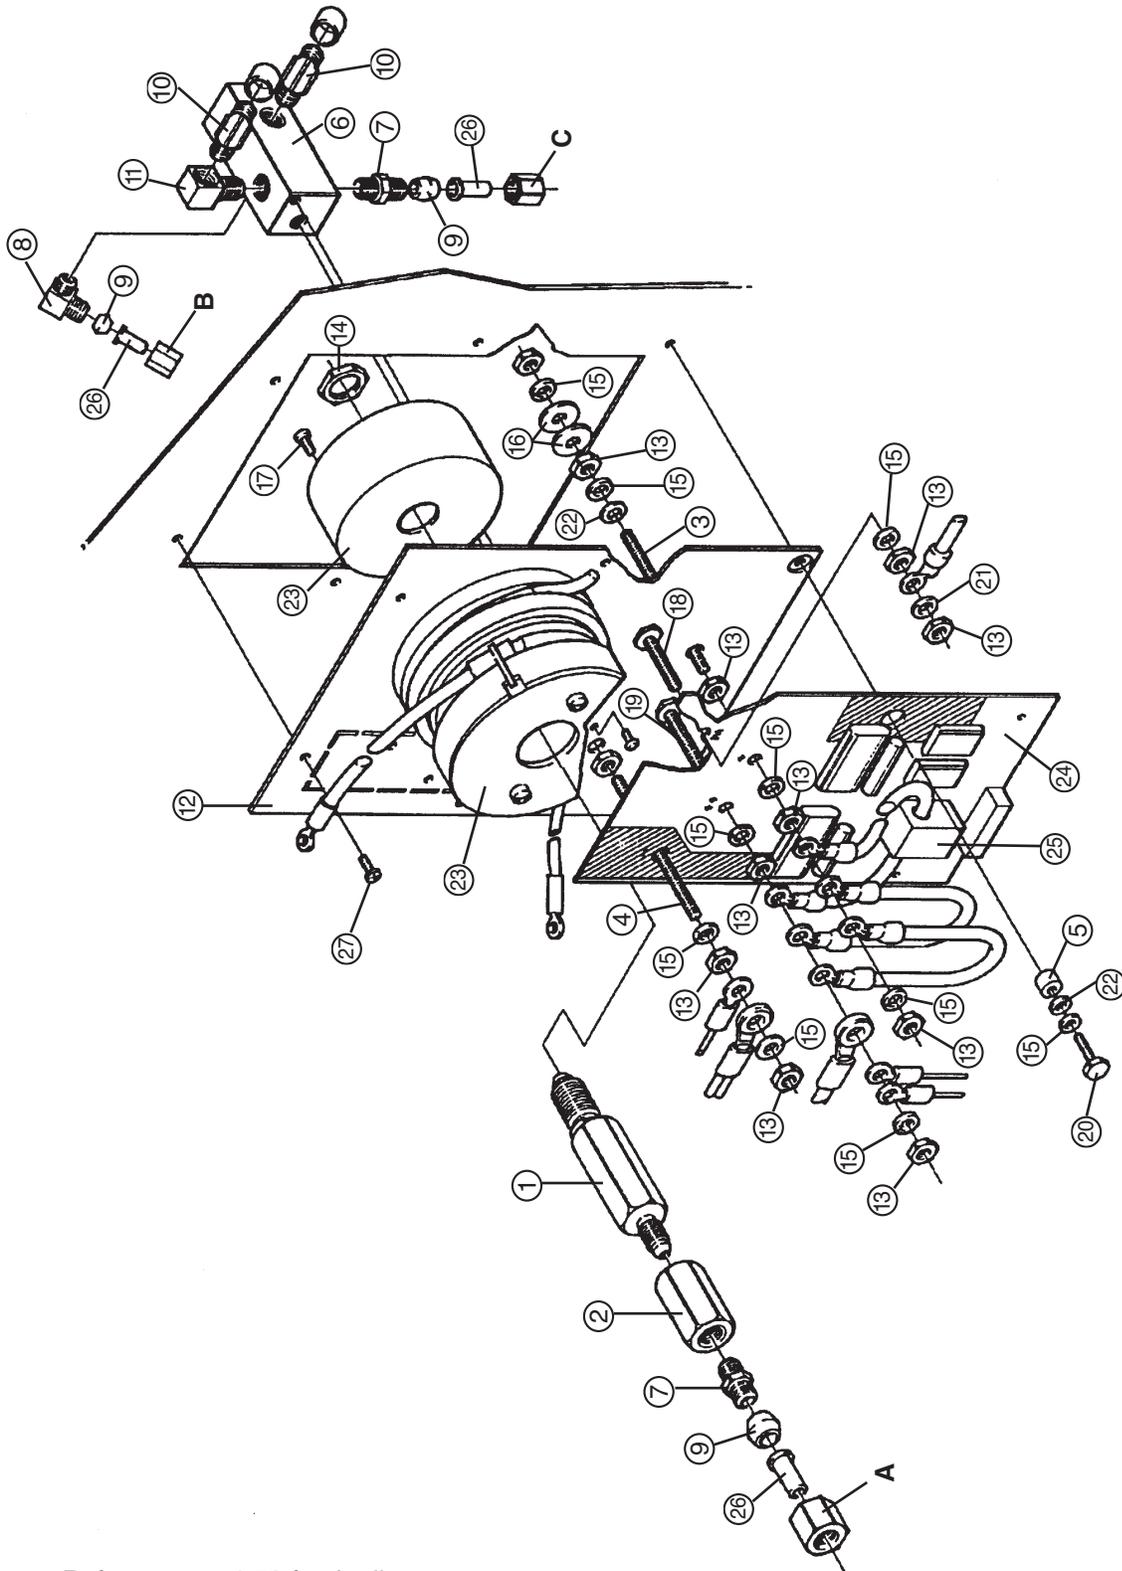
Power Supply – High Frequency & I/O PCB Assembly
